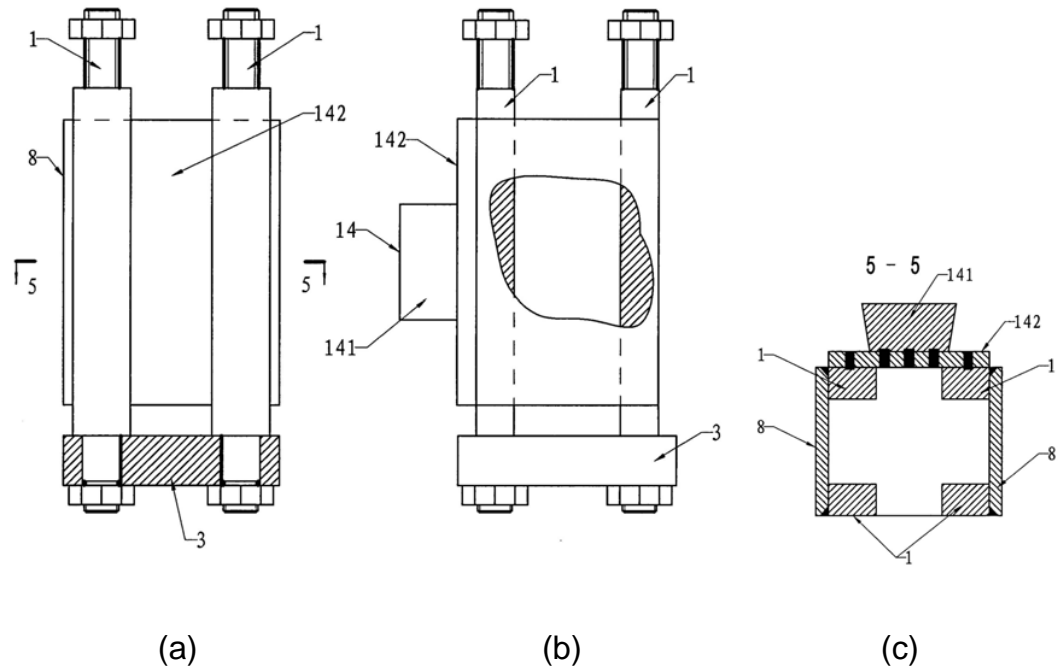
Configuration of the LST-mill stands. (a) Front view of the stand in Figure 2.2 (a); (b) left view of the stand in Figure 2.3 (a); (c) a cross-sectional view of the stand along 5-5 in Figure 2.3 (a)
